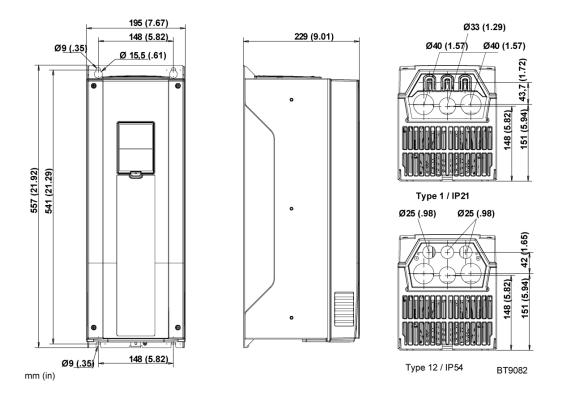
Siemens Drive Dimensions, FS6, Wall-Mount.
